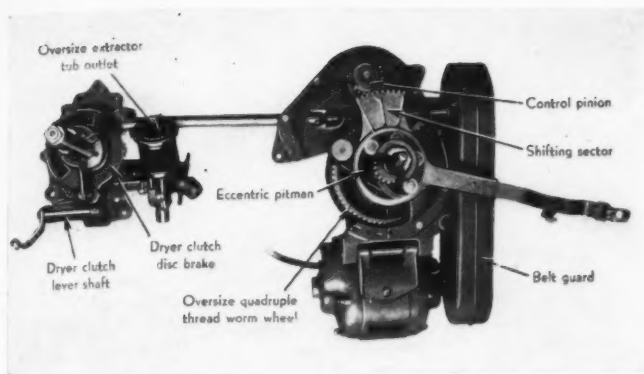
Washer mechanism from the top, with the tubs and frame removed
